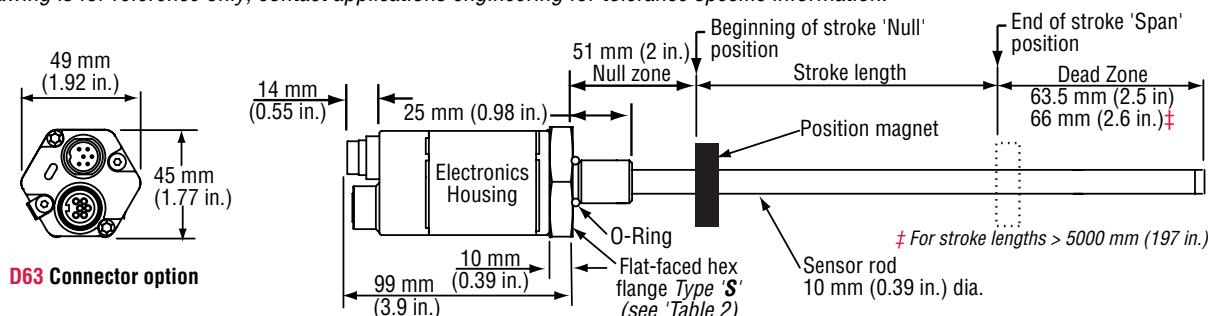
Model RH Rod-style sensor dimension reference (shown with D63 connector option)
